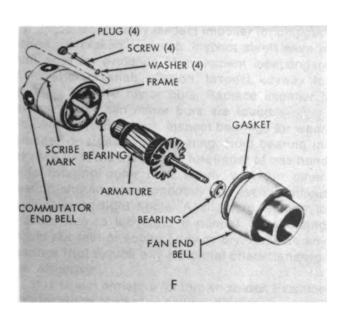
Turret ventilating blower disassembly or assembly (1 of 3).
